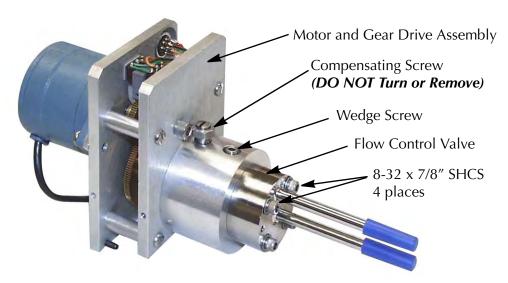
Series 245 Pressure/Flow Control Valve Assembly
